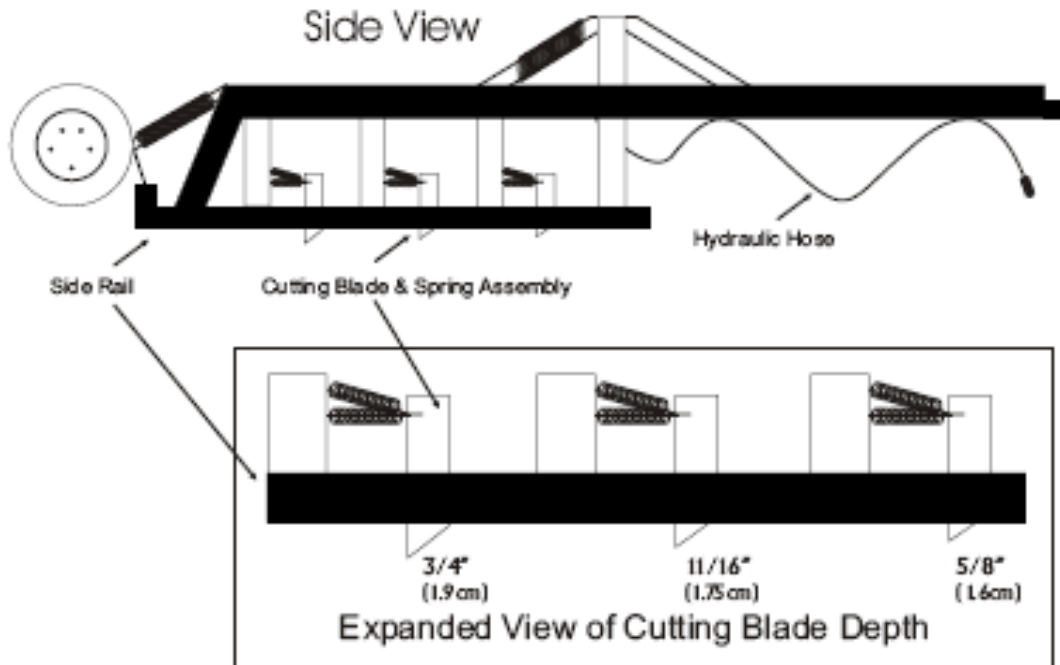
Typical multi-blade drag design: side view with expanded view of cutting blades
